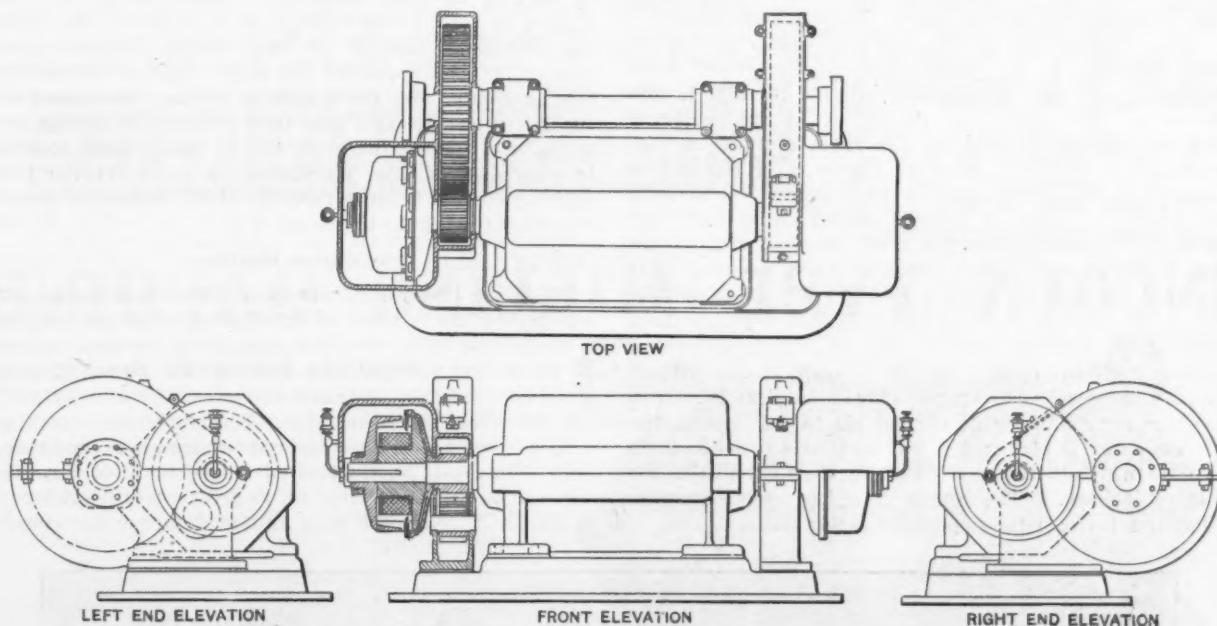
A 50-Hp. Reversing Drive for Rolling Mills, Showing the Wheeling Clutches Combined with a Crocker-Wheeler Motor.
